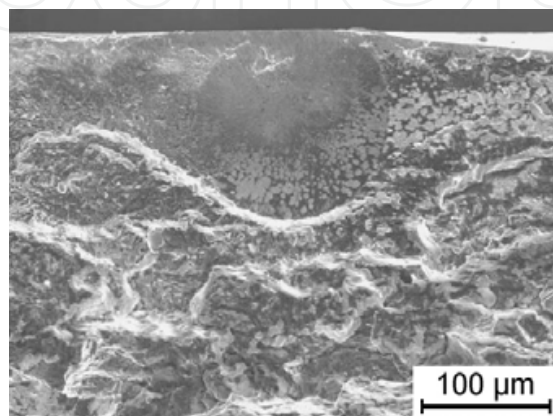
SEM-SE fractograph of the original fracture surface of a preparatively opened axial crack on the inner ring raceway of a failed taper roller bearing from an industrial gearbox
